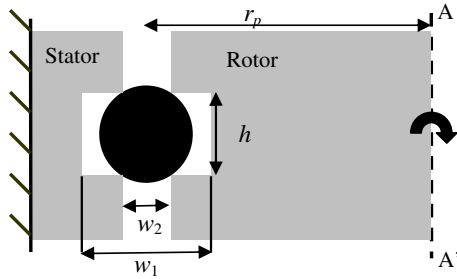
Schematic drawing showing the design of the ball bearing mechanism. The rotational axis of the rotor is shown by the A–A' dashed line on the right-hand side of the drawing.
